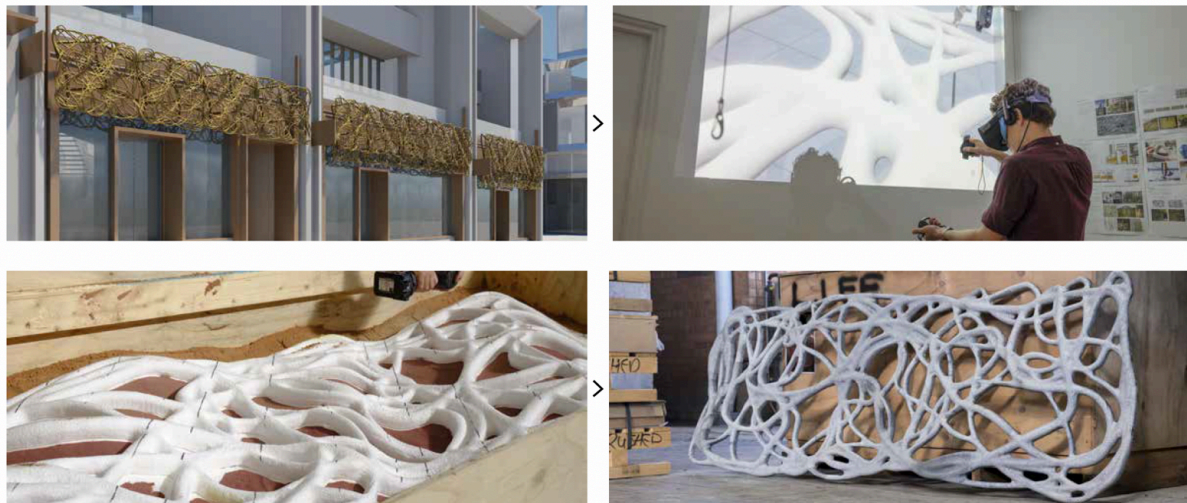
KUKA Robot Pattern Cutting and Lost Foam Workflow for Prototype Manufacture. Photo Credits: UAP Company.
